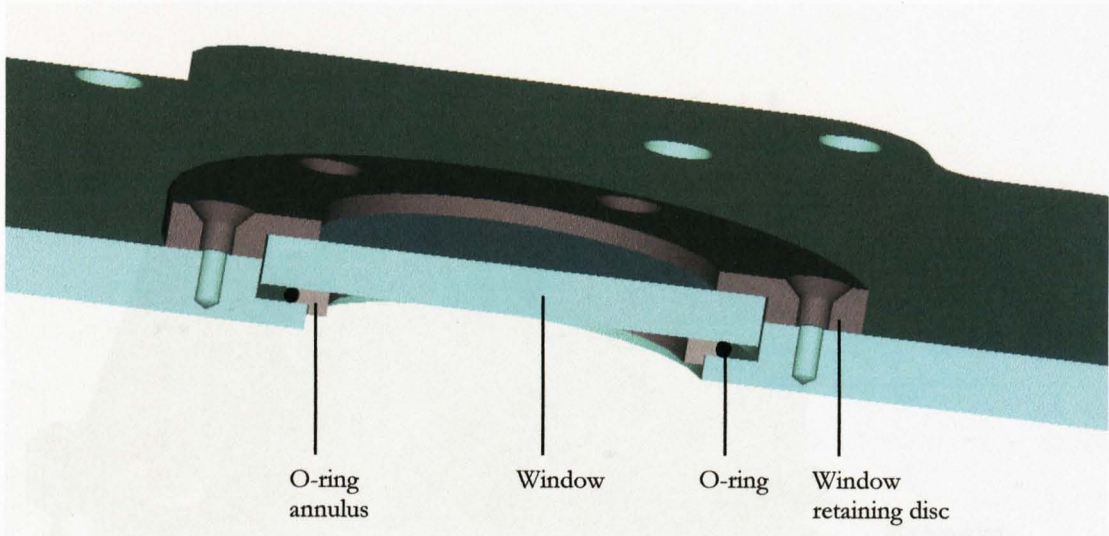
Cross-section of the CCD-head lid showing the window and o-ring vacuum seal. This type of o-ring seal has a low profile, which is essential given the lack of space between the CCD and filter.
